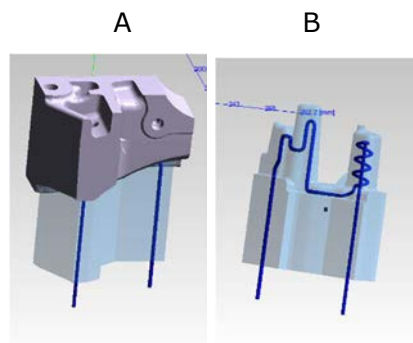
casting surrounding the ejector die insert (1) and its conformal cooling circuit design
